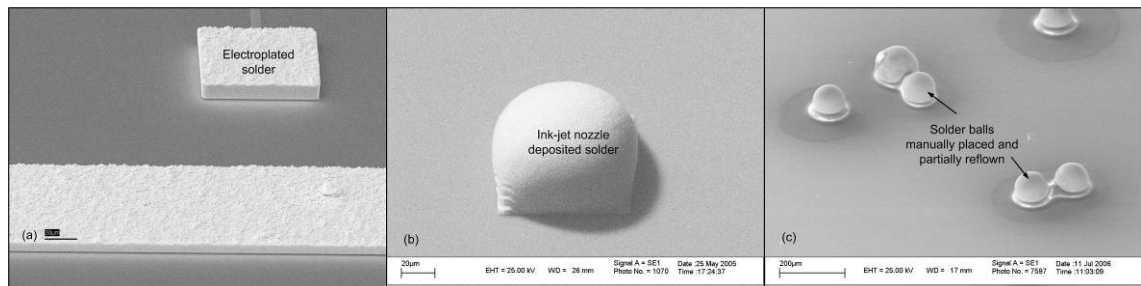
(a) Solder electroplating, (b) Solder jetting, and (c) Solder ball placement (courtesy: Trevor Sample).
